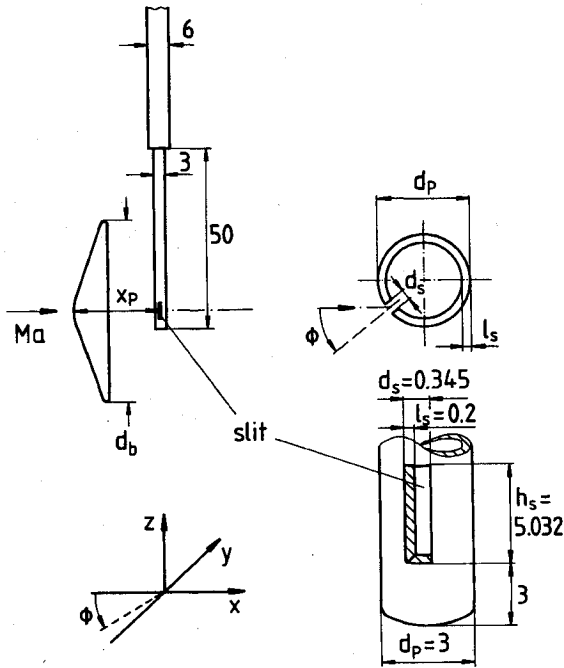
Model and Patterson probe geometry: dimensions in millimeters.
